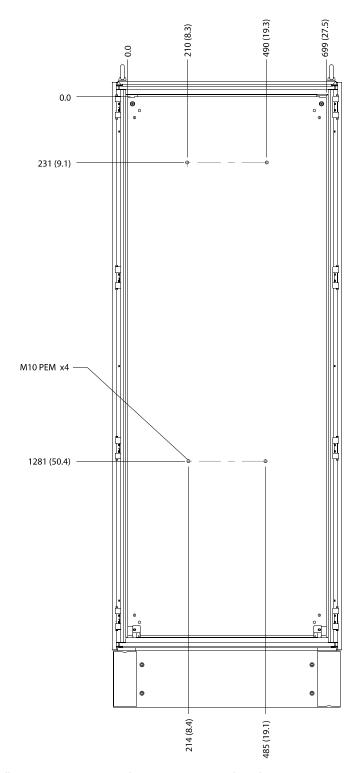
Mounting Plate Dimensions in D3h Enclosure
